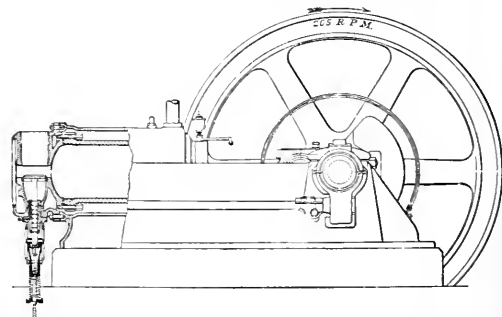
CONVERTIBLE ENGINE WITH EXHAUST VALVE ATTACHED BUT WITHOUT HEAD
